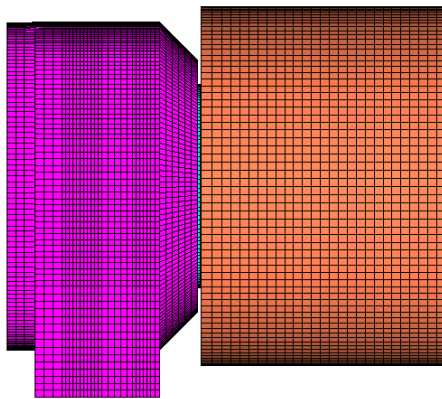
The three-dimensional mesh model of the continuous casting roller bearing assembly
